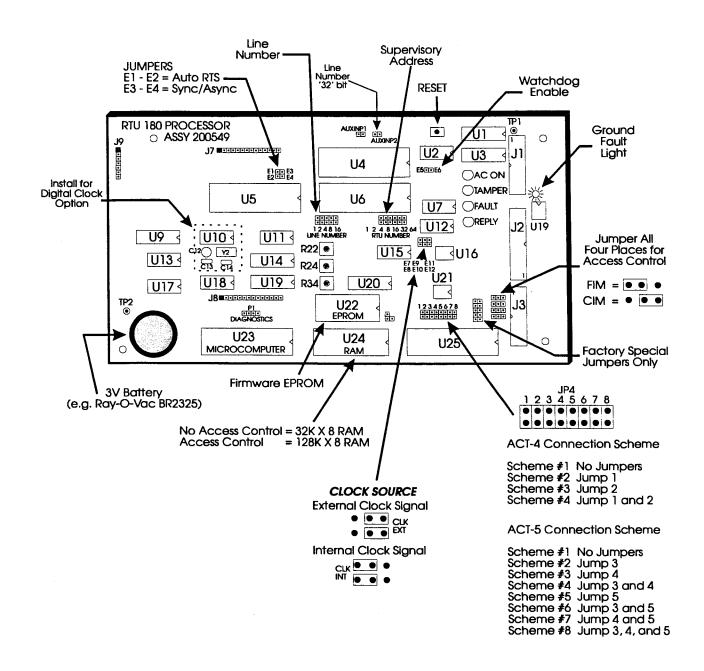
RTU 180 PROCESSOR BOARD AND SETTINGS
